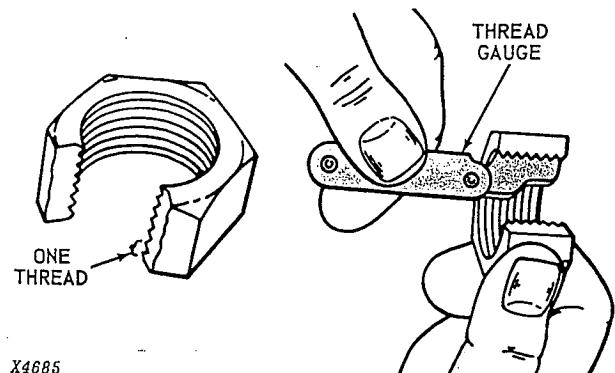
Determining Threads Per Inch with a Thread Gauge
